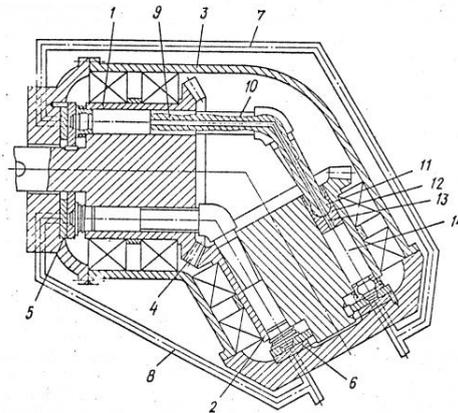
Constructive scheme of the axial piston two-unit hydraulic motor.
